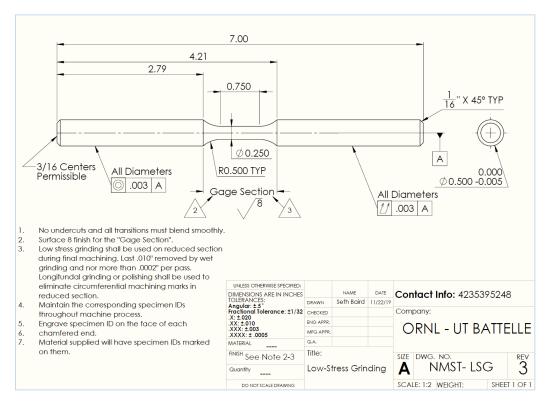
Standard creep-fatigue specimen geometry. Dimensions are in inches.
